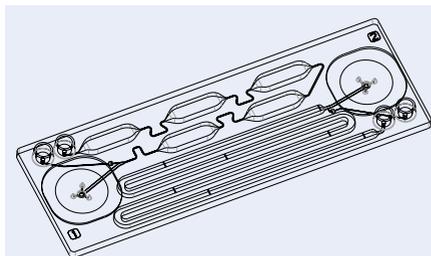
Schematic drawing of blister test chip Fluidic 522
